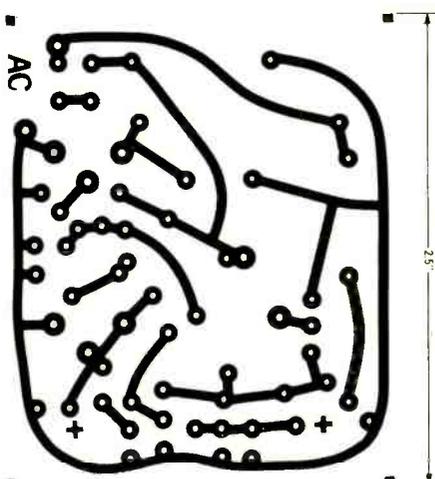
FOIL PATTERN of the line receiver PC board shown full size.
